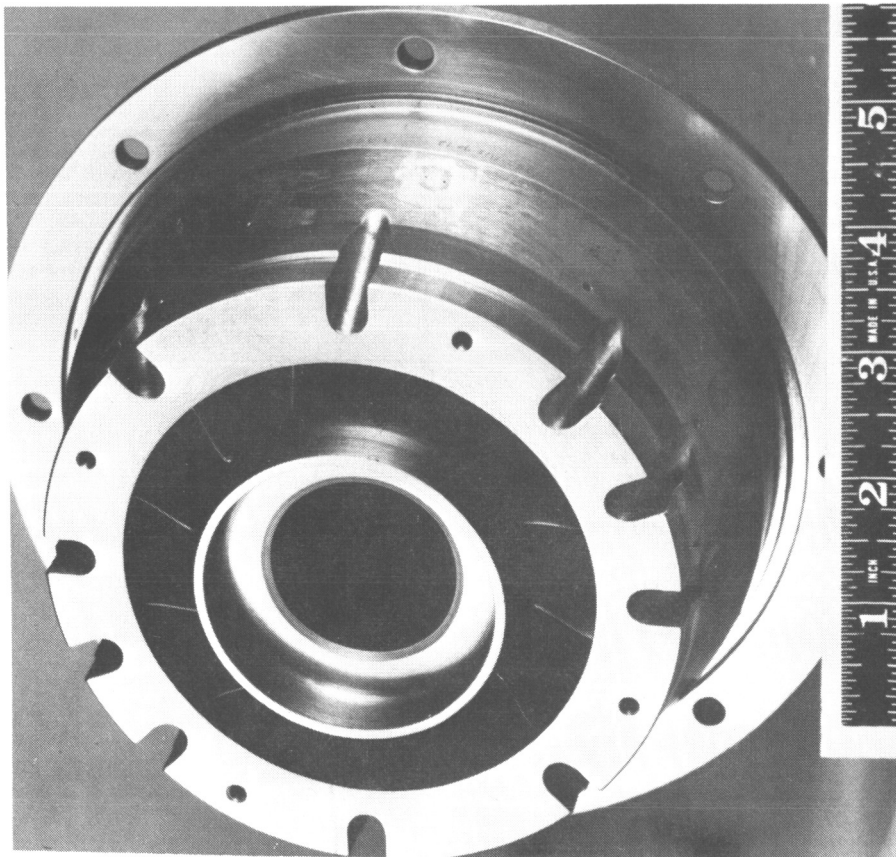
Exit End of Inlet Cone and Duct Assembly XP-57191
